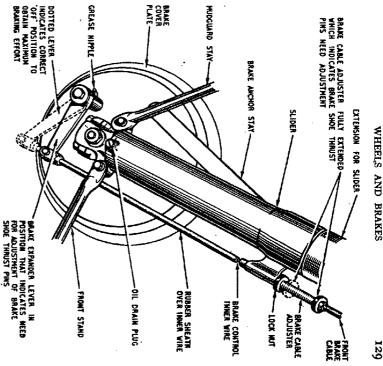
Showing Front Brake Cable Adjuster Thread Ex-HAUSTED, Indicating Brake-shoe Thrust-pin Adjustment is NECESSARY.
